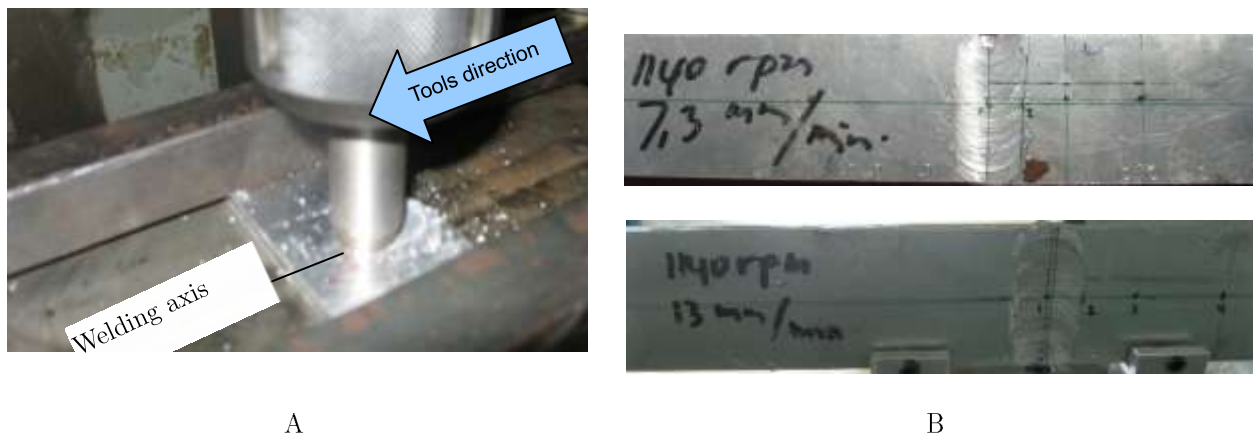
FSW welding process with a milling machine (A). Welded samples, green line perpendicular to the welding axis is the location of the measurement had been performed (B)
